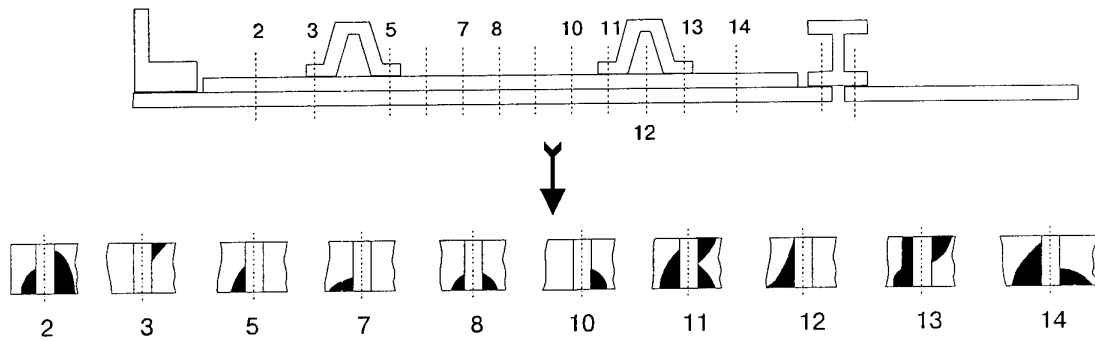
Damages in strip coupling the skin sheets on wing lower surface:
